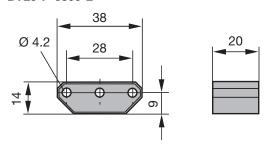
Installation dimensions of BTL5-P-3800-2 magnet
